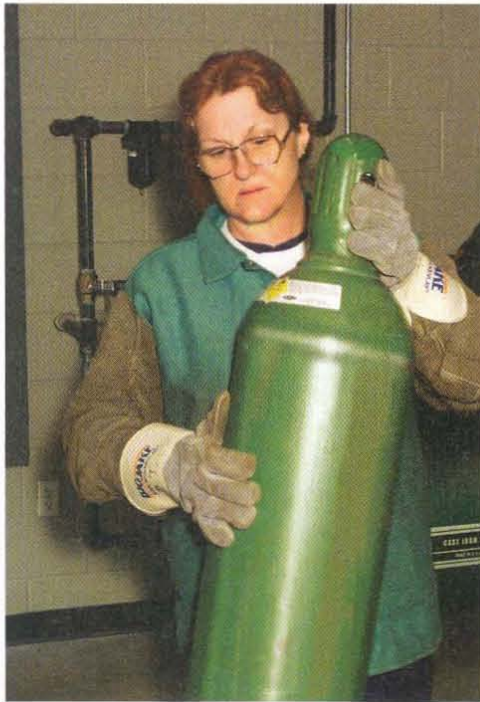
To safely move a cylinder, tilt the cylinder backward with one hand and roll the cylinder, guiding the cylinder with the other hand.
